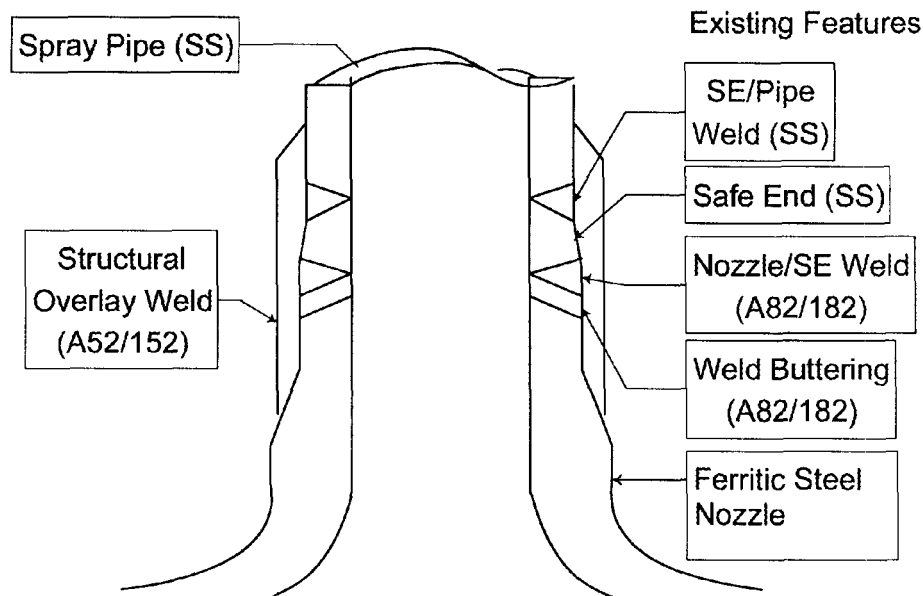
MPS3 Typical Weld Overlay Repair Configuration
